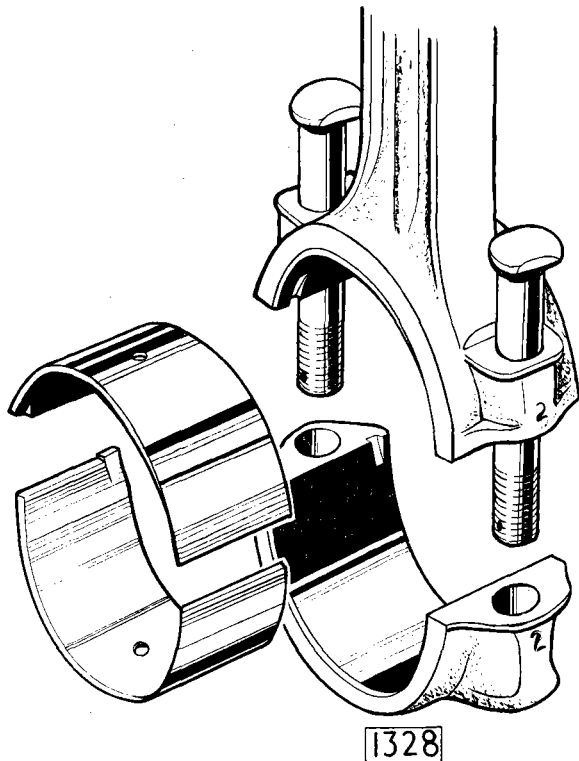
The connecting rod and cap are stamped with the cylinder number.
